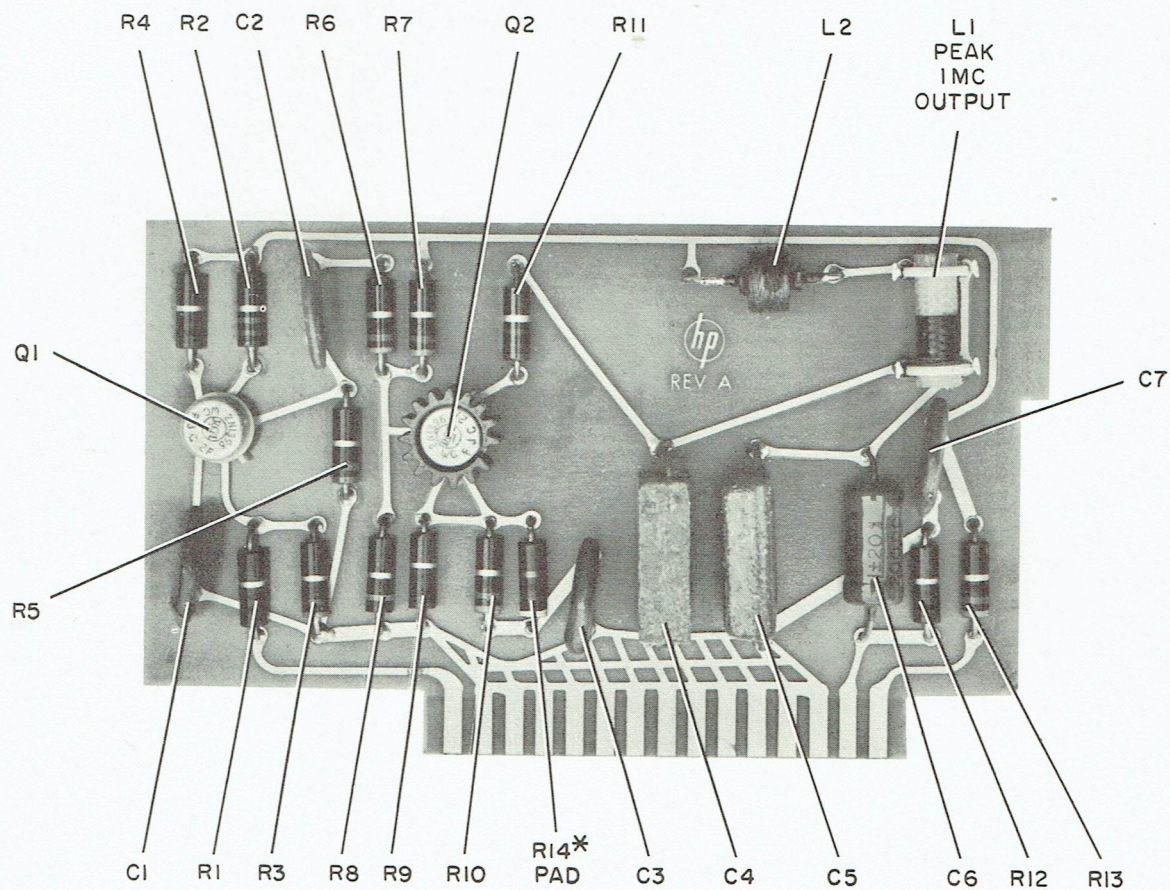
Power Supply Circuit Board A1 Parts Locations
